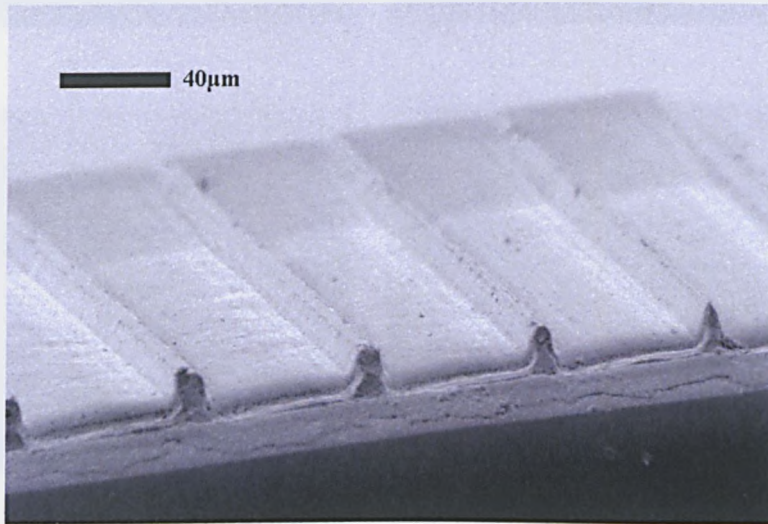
Machined ridge waveguides in fused silica by using static mask – workpiece dragging process.
